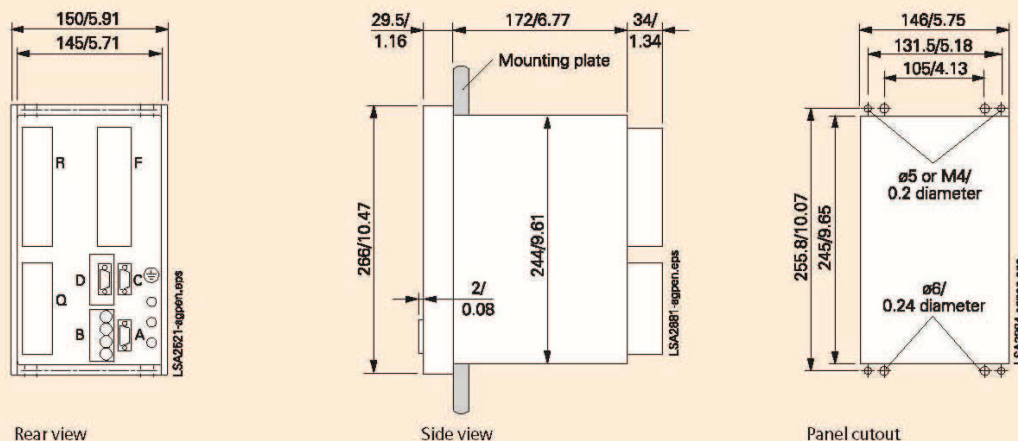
7VE61 mounted in 1/3 flush-mounting housing 7XP20 for panel flush mounting/cubicle mounting
